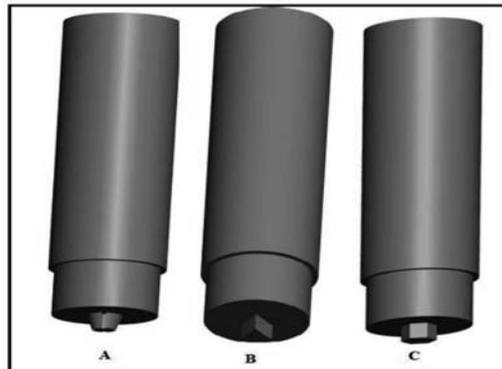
Tool pin geometry used (A) Four flute pin (B) Triangular pin (C) Hexagonal pin
